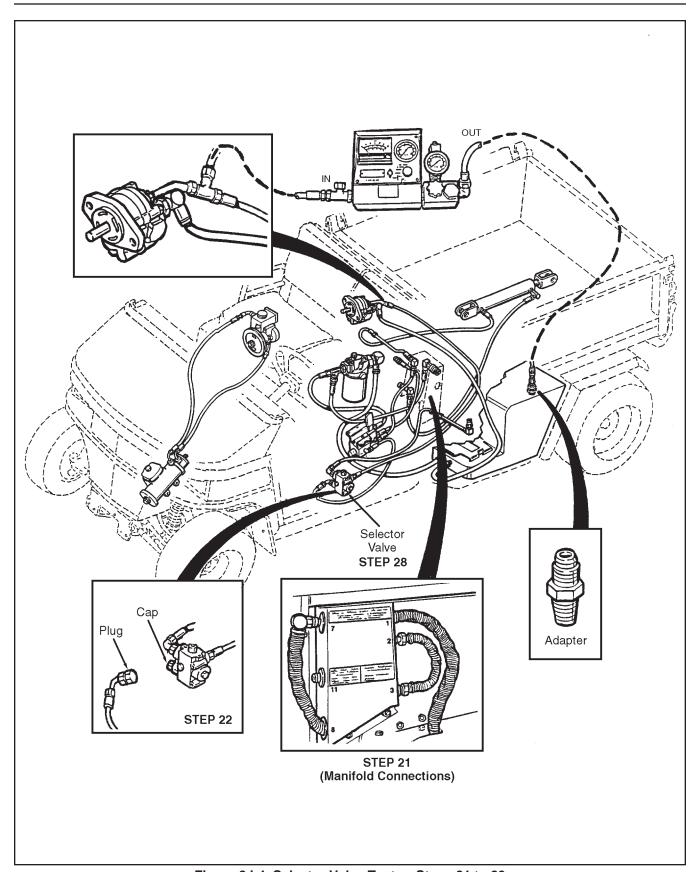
J-4. Selector Valve Test — Steps 21 to 29
